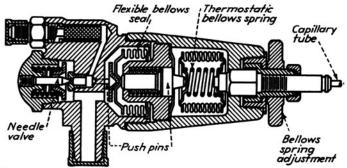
Two bellows units are used in the Fedders thermostatic expansion valve for controlling large refrigeration systems. A removable power bellows unit is operated by vapor pressure in a bulb attached to the evaporator output line. The second bellows serves as a flexible, gastight seal for the gas valve. A stainless steel spring holds the valve closed until opened by pressure transmitted from the thermostatic bellows through a molded push pin.
